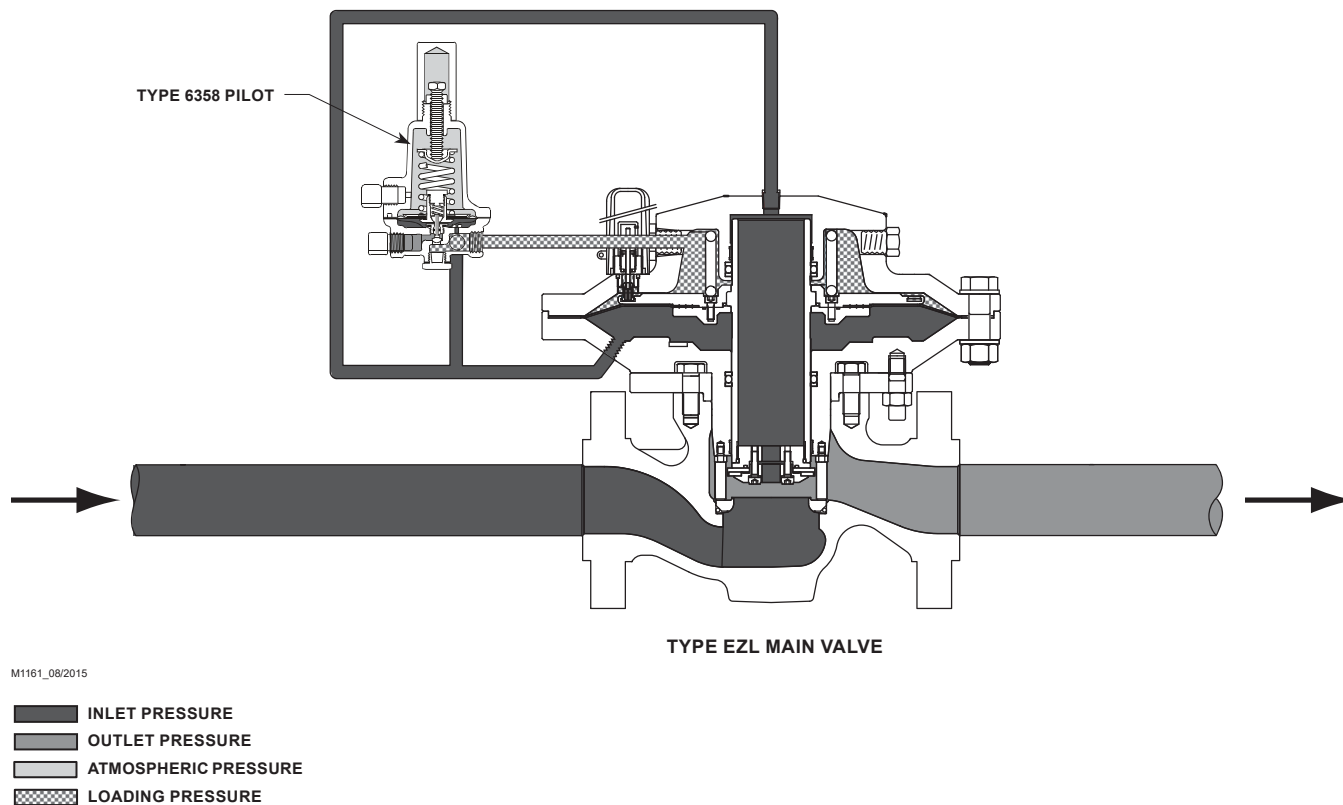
Type EZL Relief Valve or Backpressure Regulator
